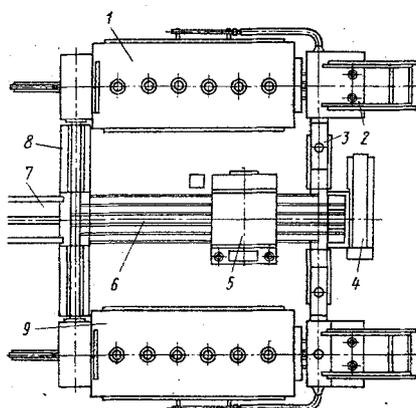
Apparatus for heat treating forged turbine blades. 1) Pusher quenching furnace; 2) quenching device; 3) air spray; 4) belt conveyor; 5) washer; 6) intermediate conveying device; 7) loading station; 8) transporting device to feed forgings to furnace; 9) pusher tempering furnace.
